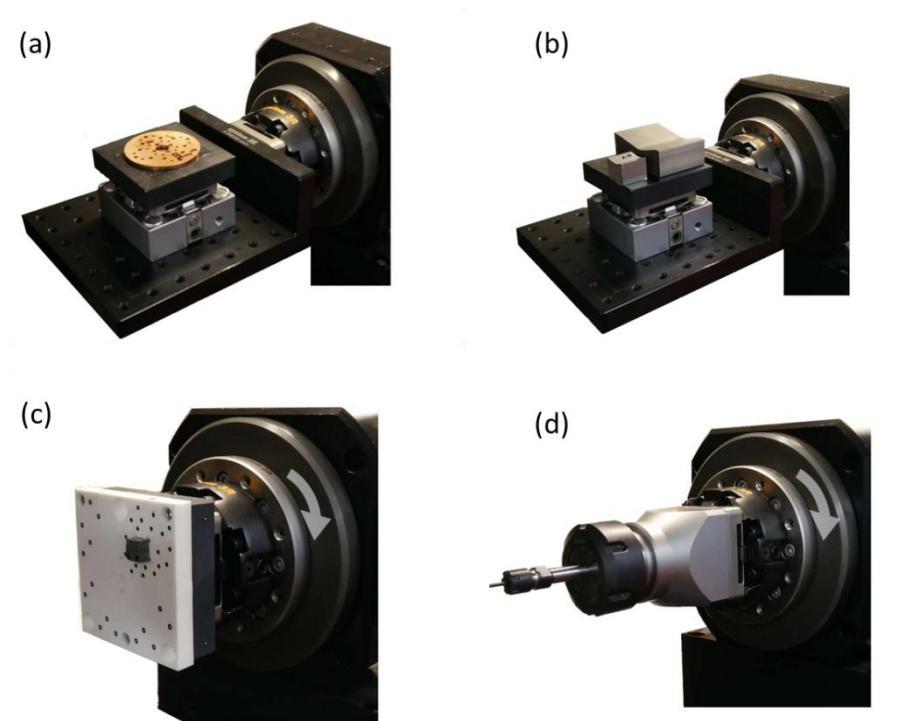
Workpiece holding extensions to realize: (a) one-side processing of a single part; (b) one-side processing of an array of parts; (c) multi-side processing of a single part; (d) machining of axis symmetric parts
